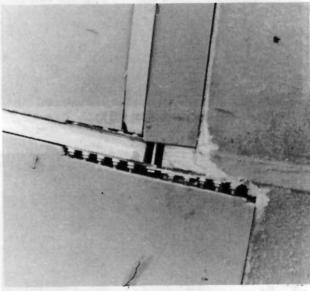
Outer wing attach. Note end rib and plate. Bolt area to be stuffed with foam chips.
